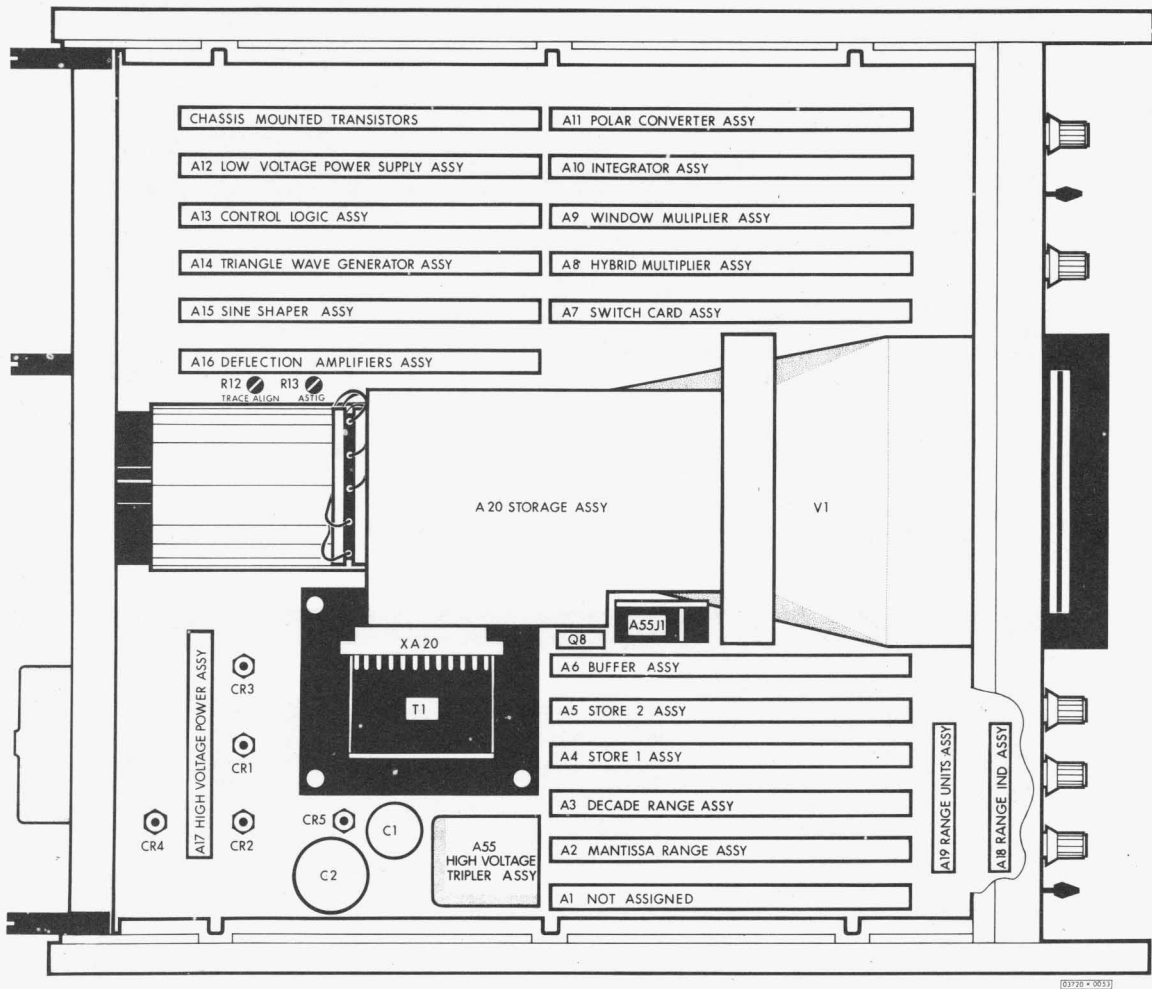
Location of assemblies and chassis mounted components (top view)
